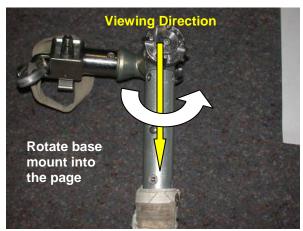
Rotate Base Mount Assembly Counter Clockwise 180° CCW.
